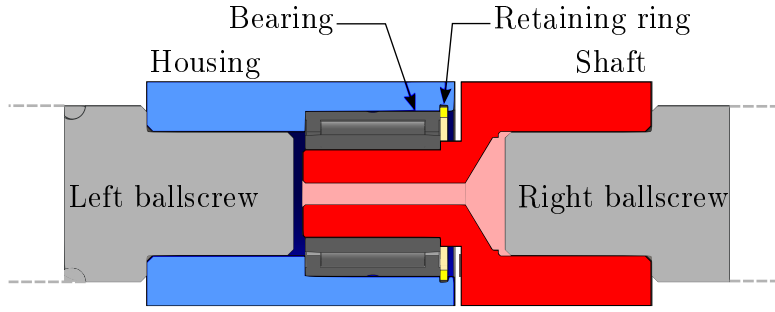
Ballscrew coupling: bearing, housing and shaft
